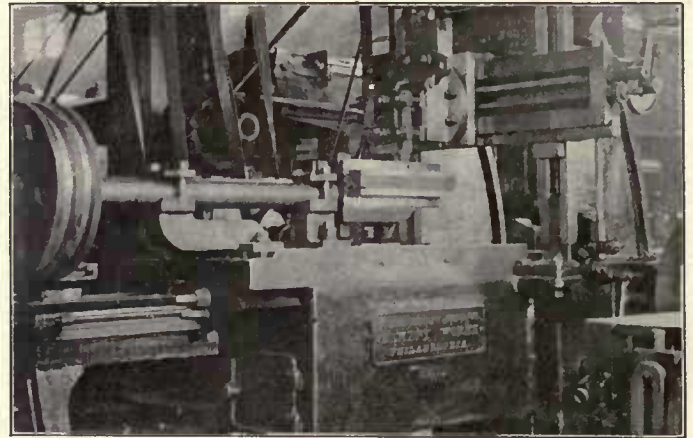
V-Blocks for Supporting and Clamping the Piston Rod When Planing Crossheads.
